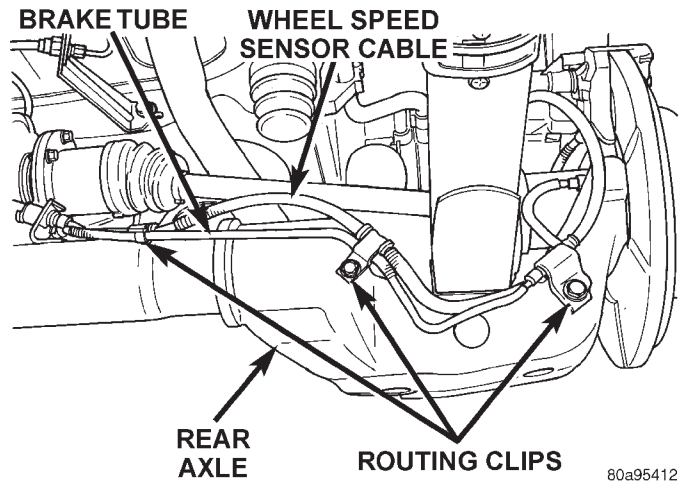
Rear Speed Sensor Routing Brackets And Clips
